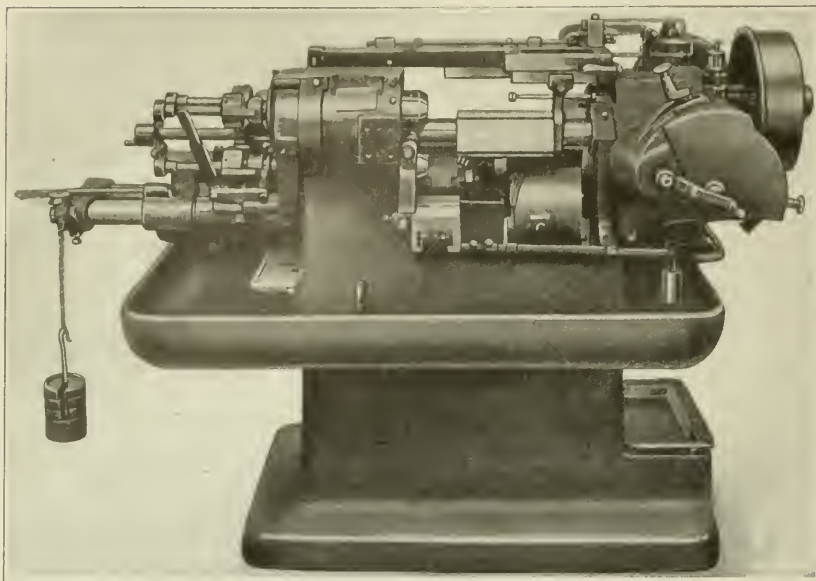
Front View of Gridley Multiple-spindle Automatic Screw Machine
